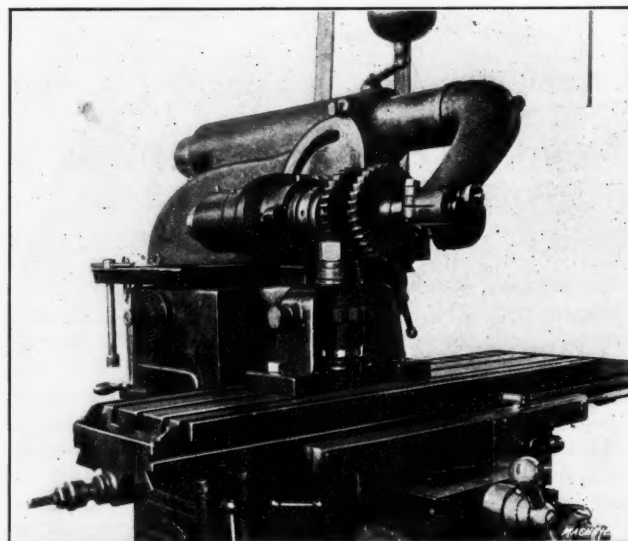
Bemis Auxiliary Head set up on the Milling Machine
